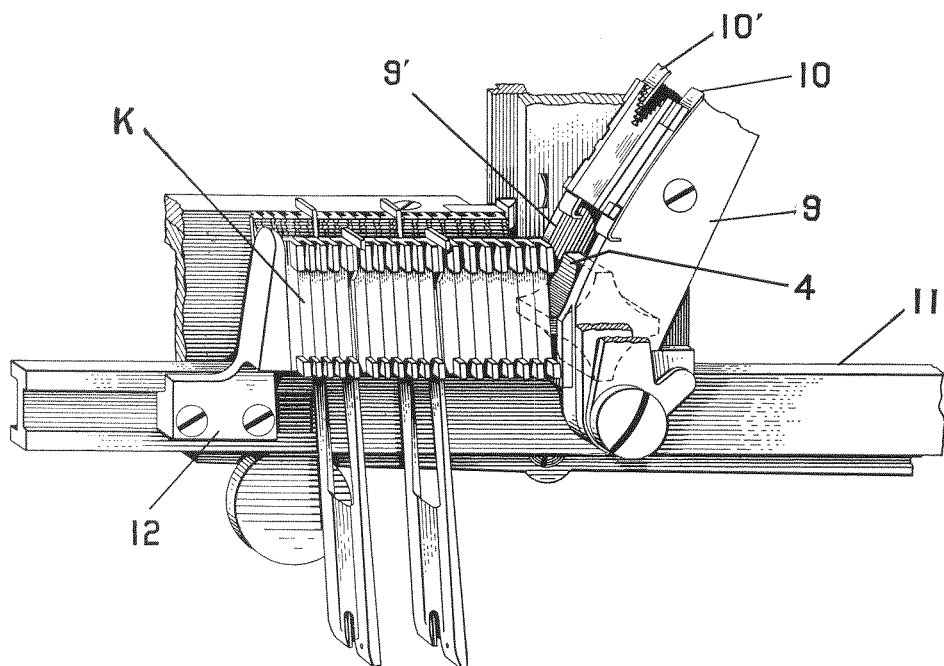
View showing a part of the assembler block and part of the assembler elevator or assembler stick. The front part of the assembling elevator is cut away so as to show the assembler slide 11, and the finger on the assembler slide 12. The matrices assemble against this finger 12.
